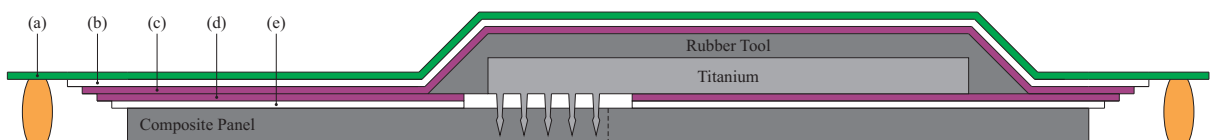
Complete tooling assembly within vacuum bag. (a) Vacuum bag adhered to tool surface. (b) Breather layer. (c) Release film over tooling. (d) Release film under tooling and titanium, with cutout. (e) Peel-ply with cutout. Composite panel to right of dashed line cut away after cure. Not to scale.
